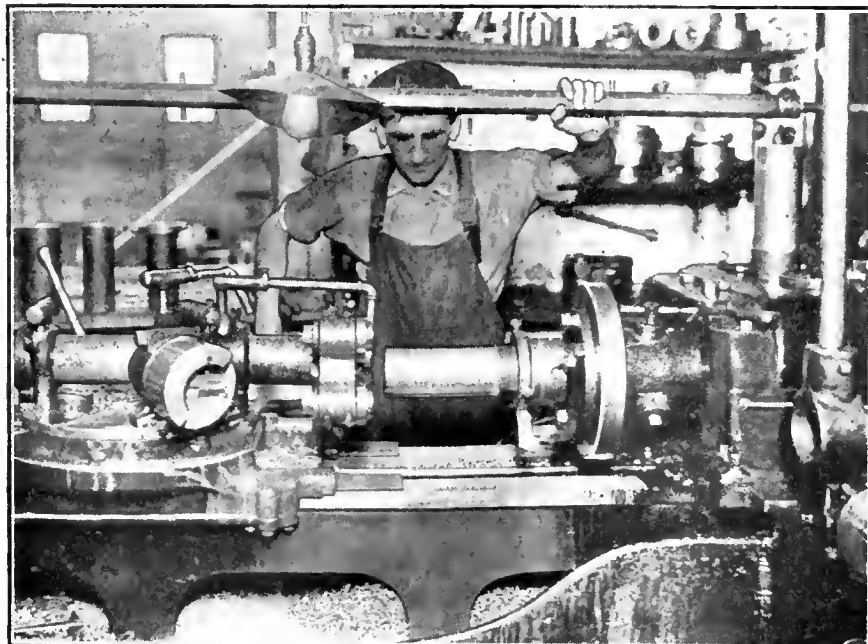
ROUGH TURNING SHELL BODY ON "STEVENS" FLAT TURRET LATHE.
